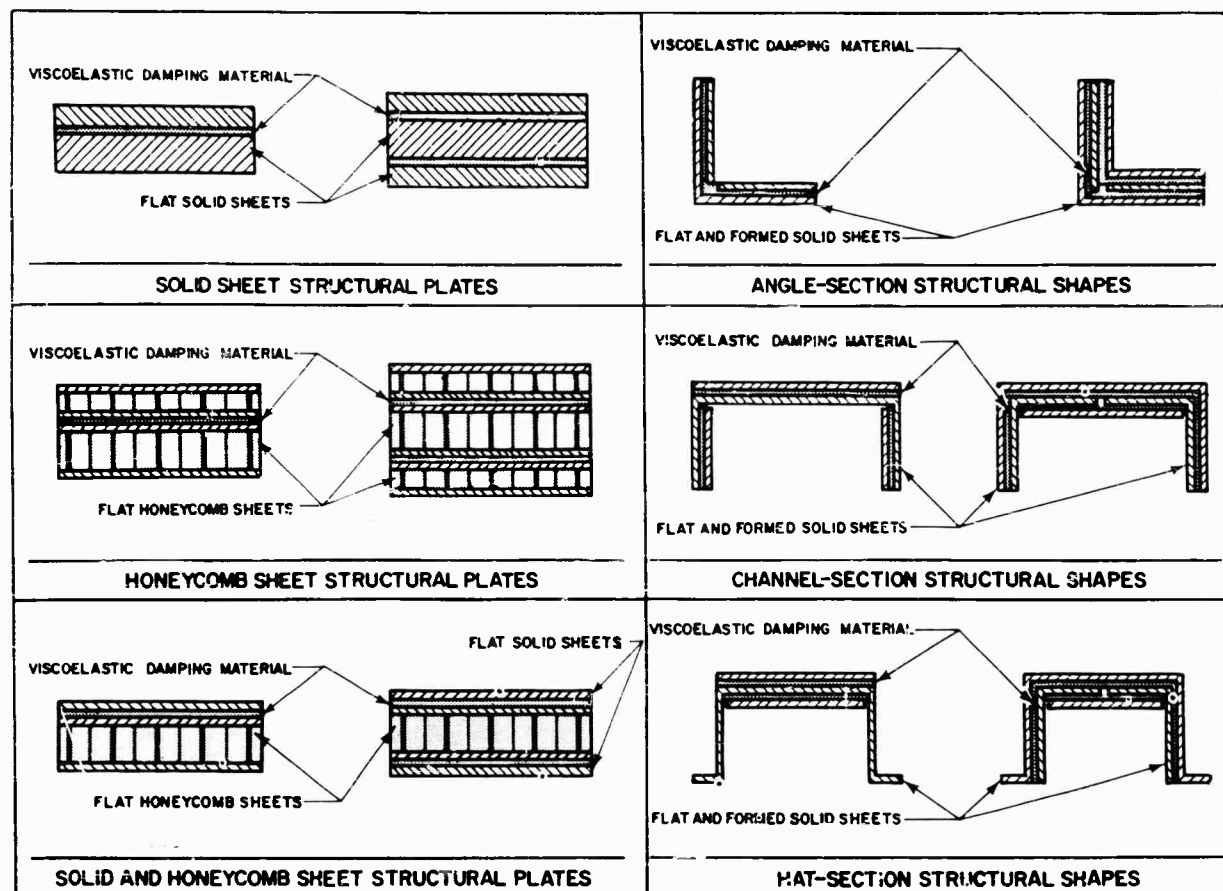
Cross sections of typical viscoelastic shear-damped structural plates and shapes
